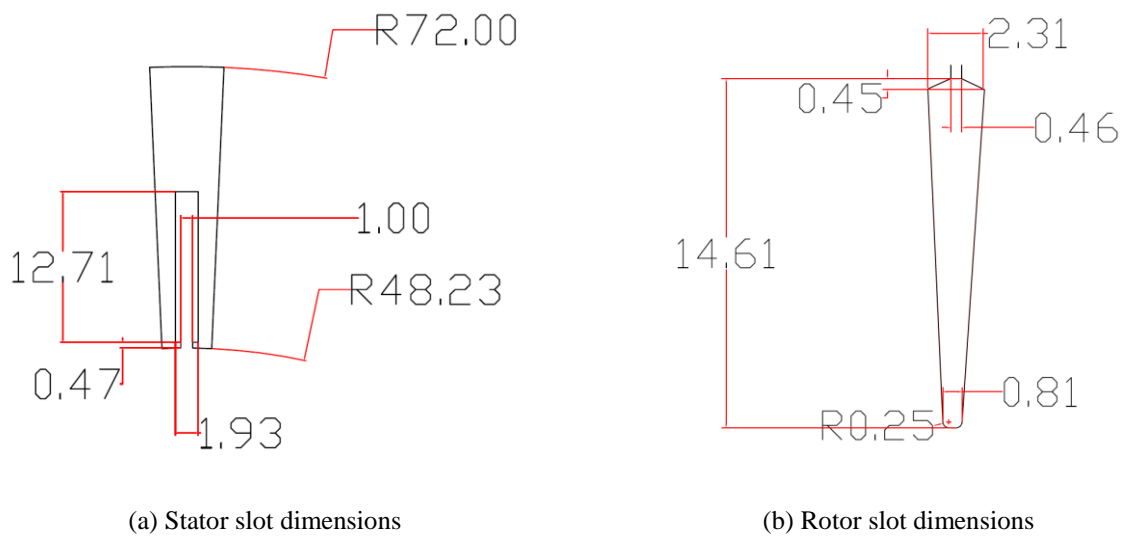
Drawing of baseline induction machine stator and rotor slot dimension.
